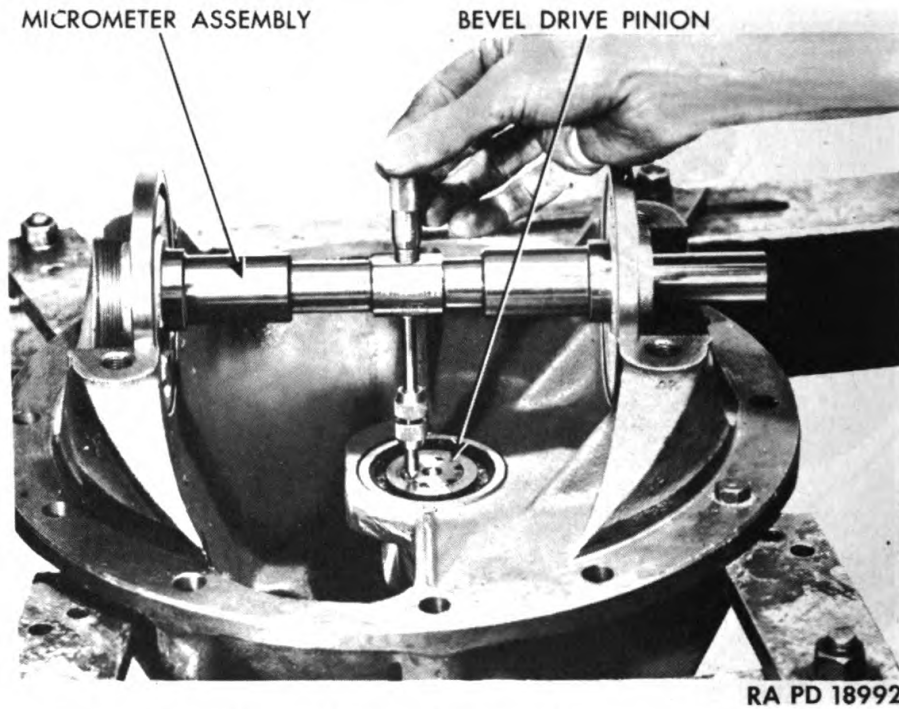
Measuring Bevel Drive Pinion Cone Center
